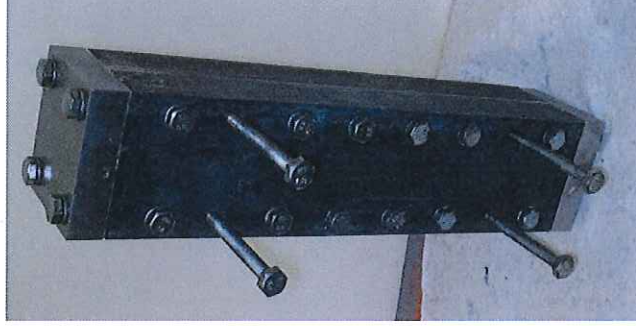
The 4 pieces of the steel mal are held together with steel bolts.
